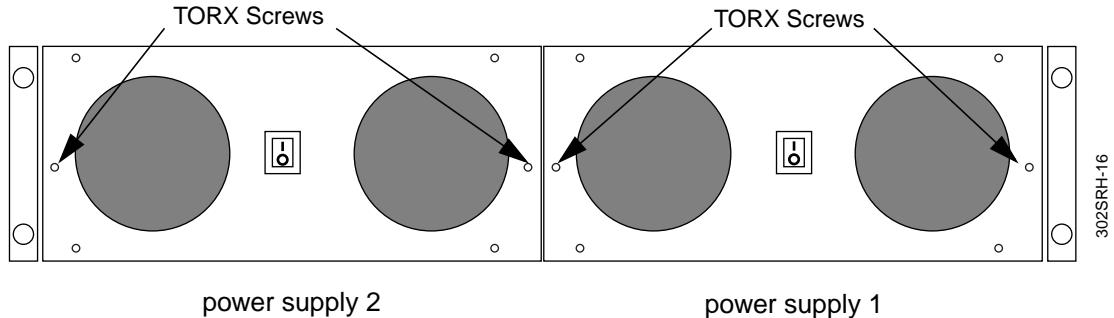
Front View: Location of Torx Screws Connecting Power Supplies to Chassis
